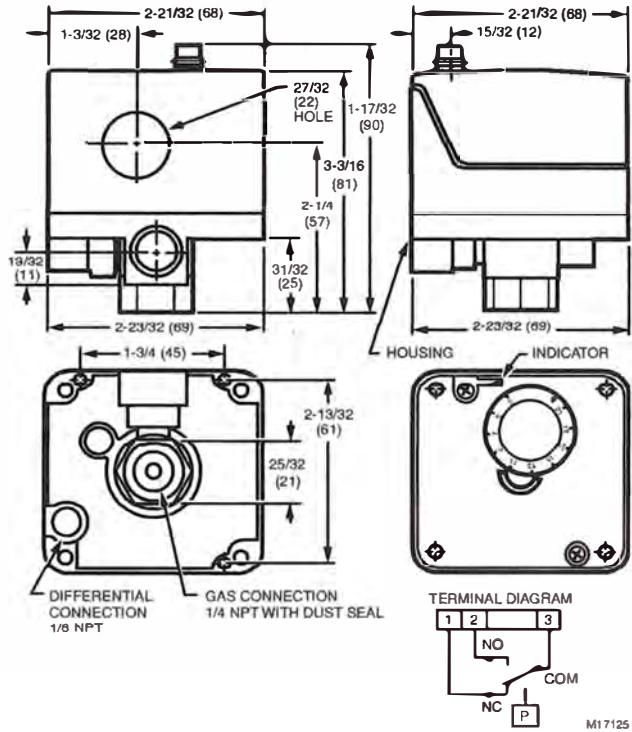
C6097 1/4 in. NPT Mount dimensions in in. (mm).
